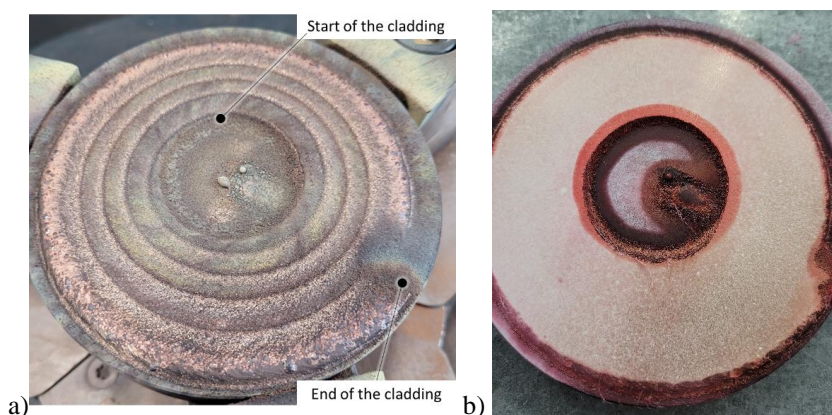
Top view of the specimen a) after the laser cladding and b) after machining and penetration test
